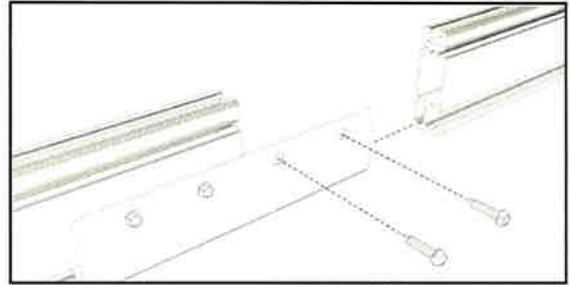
Splice bars slide into the footing bolt slots of SOLARMOUNT rail sections.
